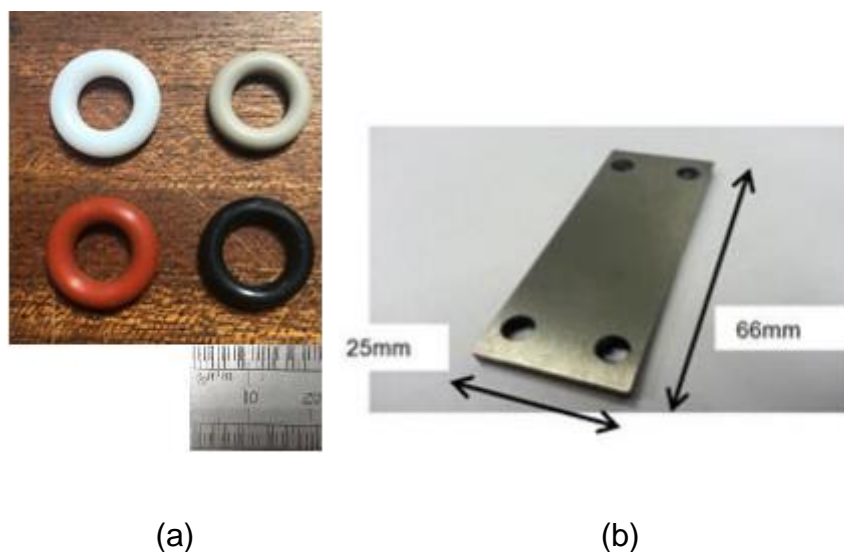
Graphic view of the specimens (a) O-rings specimens (PTFE, PEEK, Silicone and NBR) (b) cast iron flat specimen
